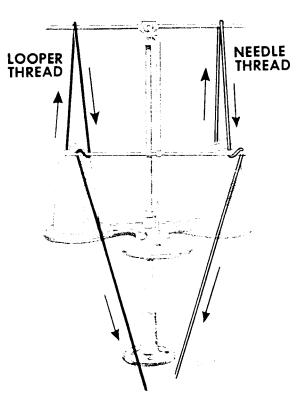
Unwinder 151031 Threaded for Two-Thread Stitch
